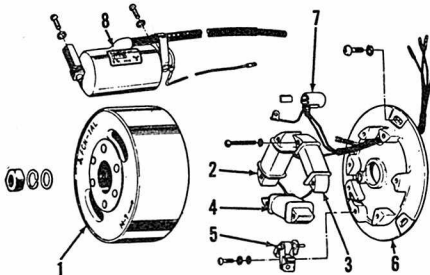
Exploded view of the ignition and electrical system flywheel assembly. Ignition coil (8) is located inside frame under the fuel tank.
